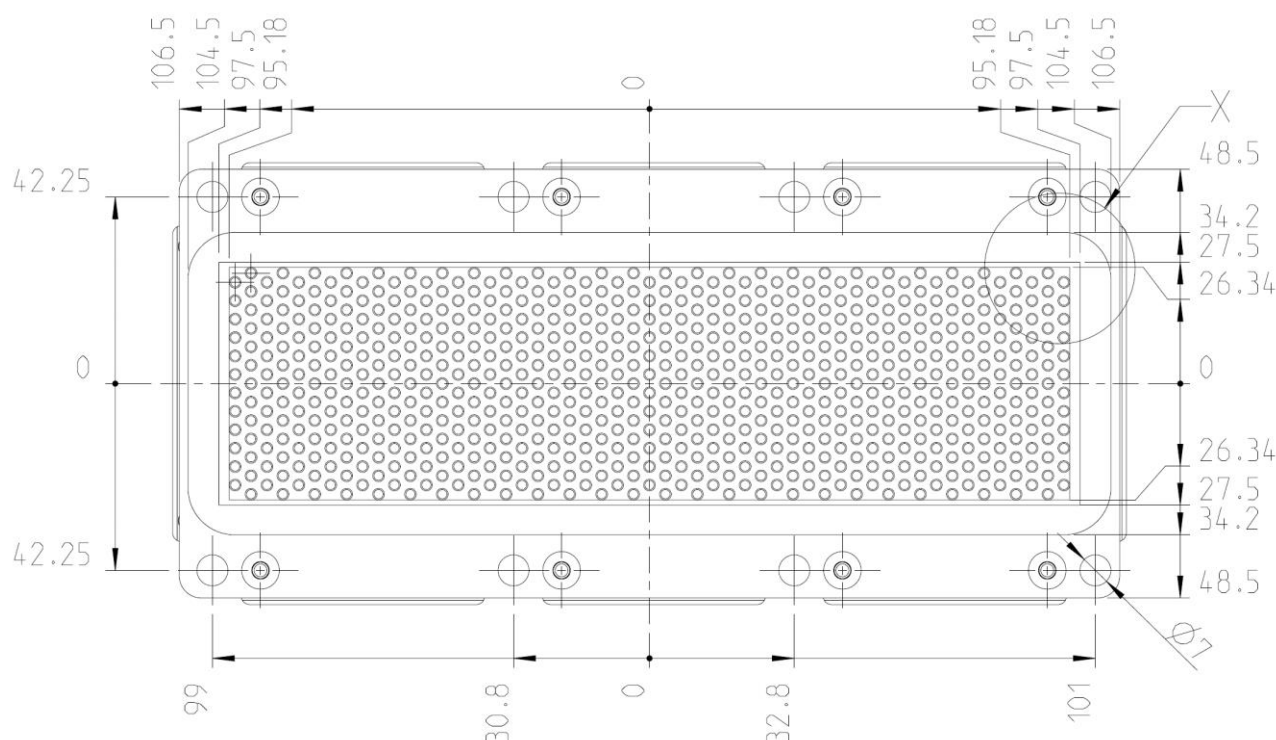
Technical drawing of HybridPACK™ 2 bottom side.
